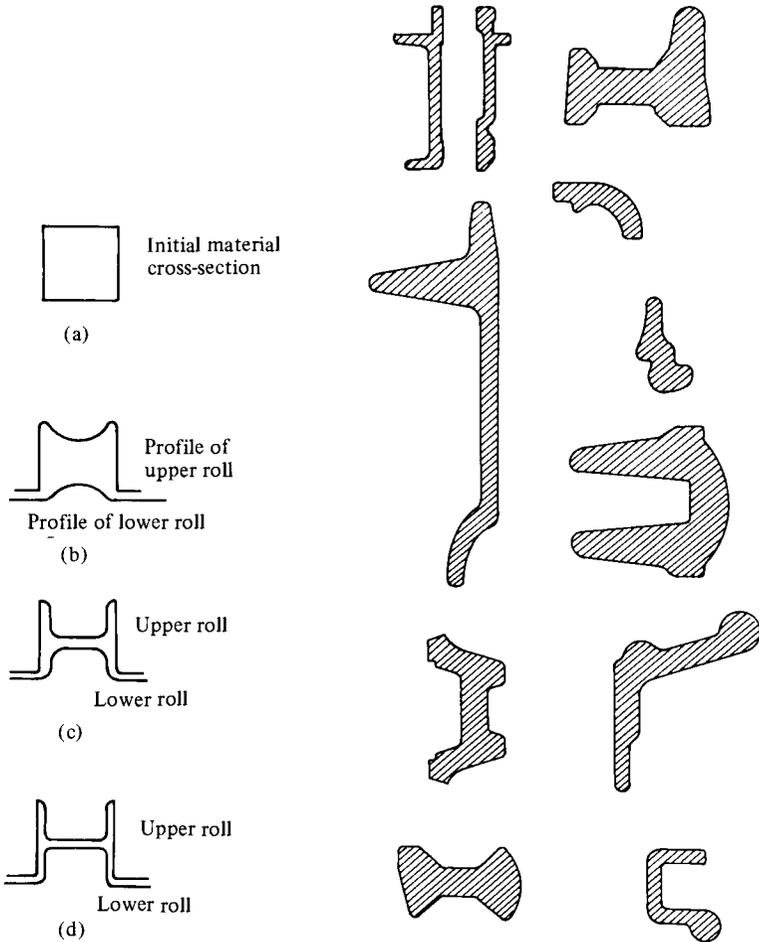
(a) The type of rolling sequence used for a structural beam section (b), (c), (d) Examples of rolled sections
